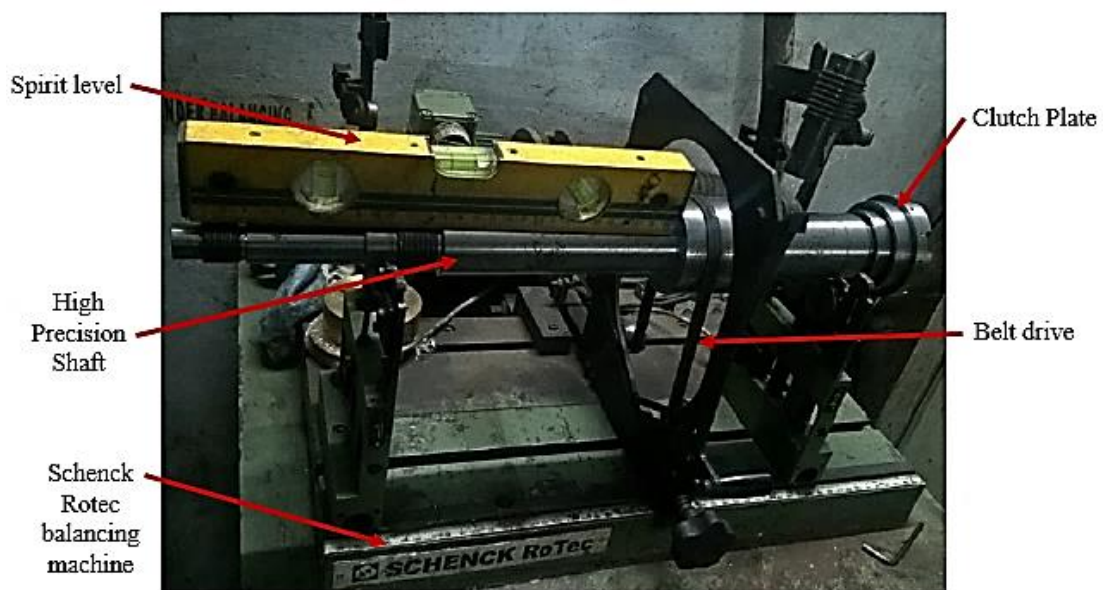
Dynamic balancing of the rotor shaft using the SCHENCK RoTec balancing machine at 1000 RPM
